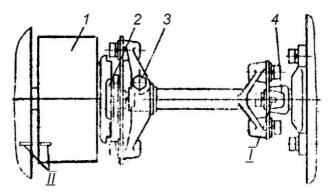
Setting the moment of fuel injection start in the first cylinder of the engine by the tags:
